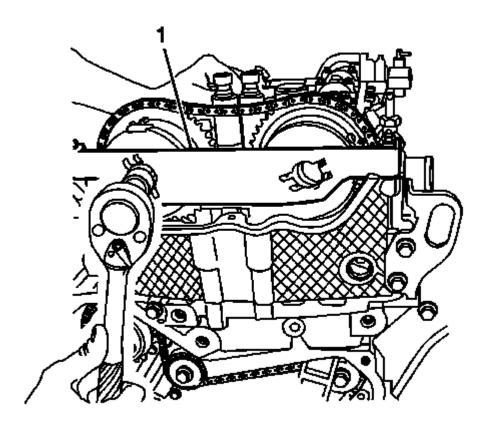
Timing Chain Retention Tool On Intake Side Courtesy of GENERAL MOTORS COMPANY
